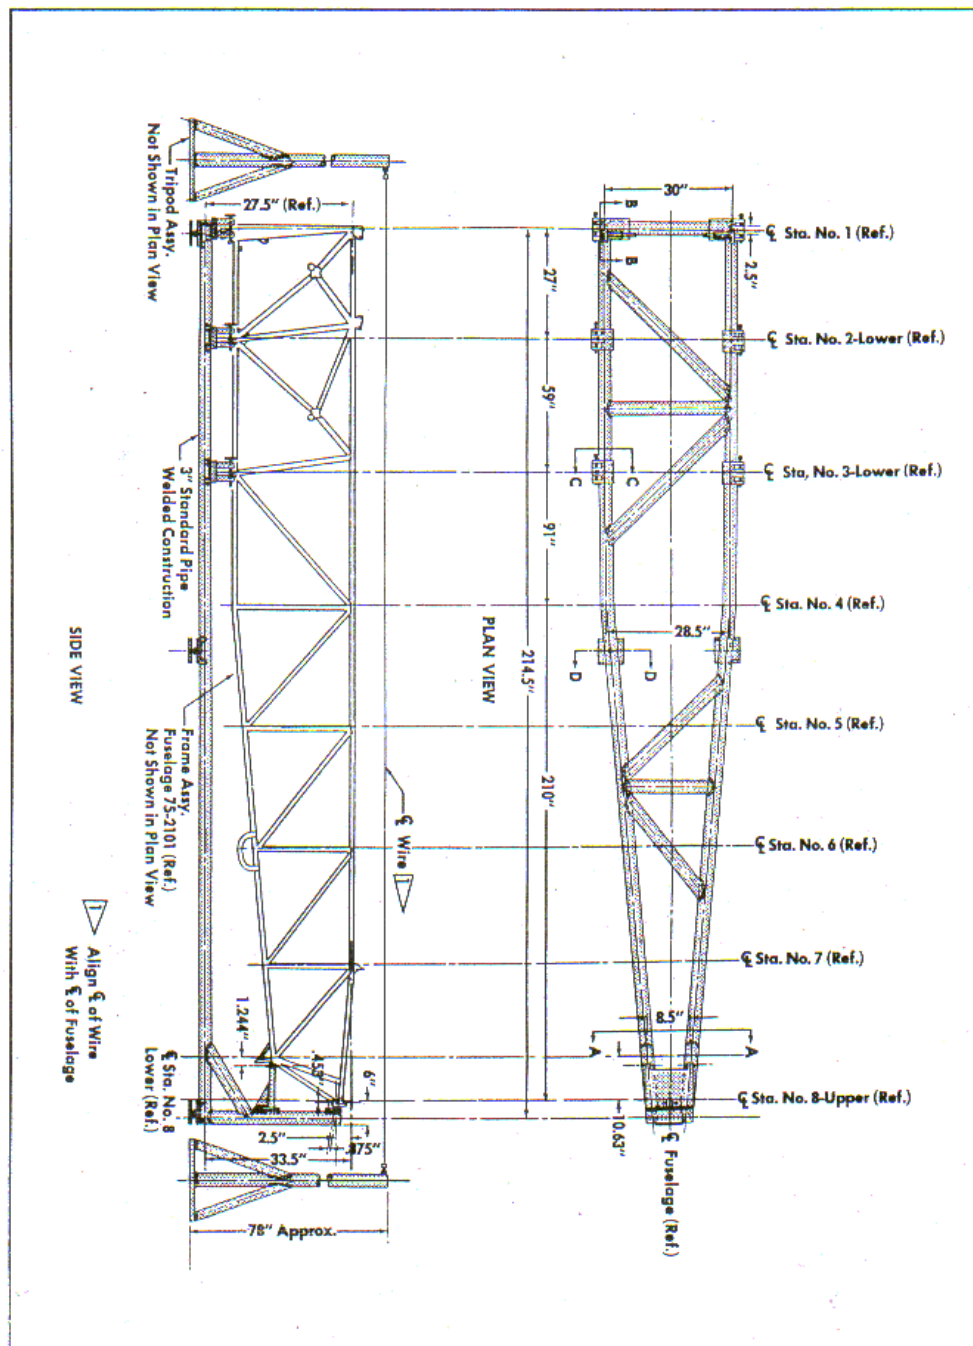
(Sheet 1 of 2 Sheets)—Fuselage Repair Jig
